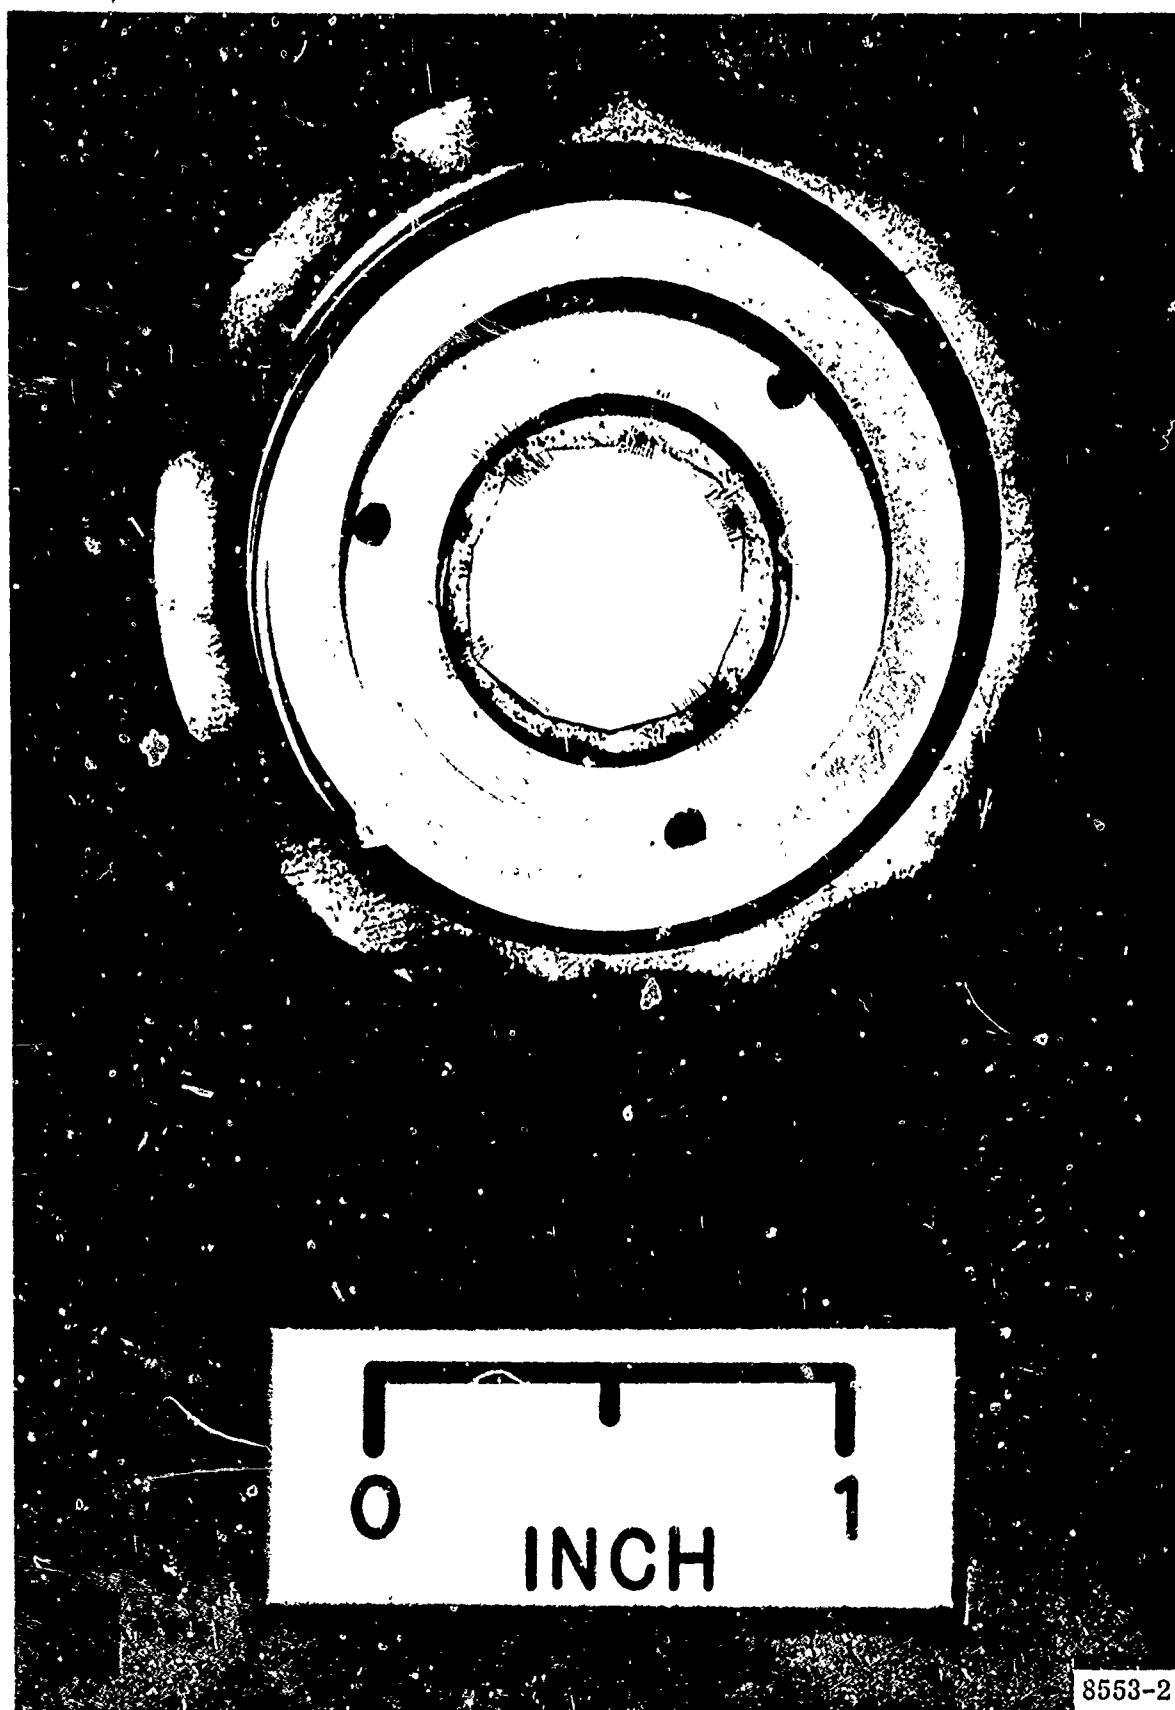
Completed target assembly with a full size 1.40 cm² target.
